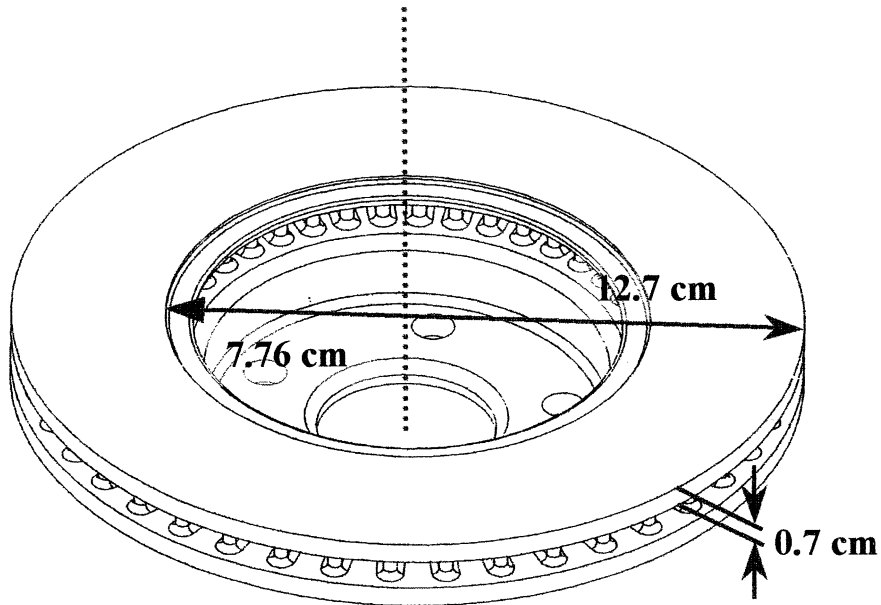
Schematic of a typical passenger car brake rotor with dimensions used in the present analysis.
